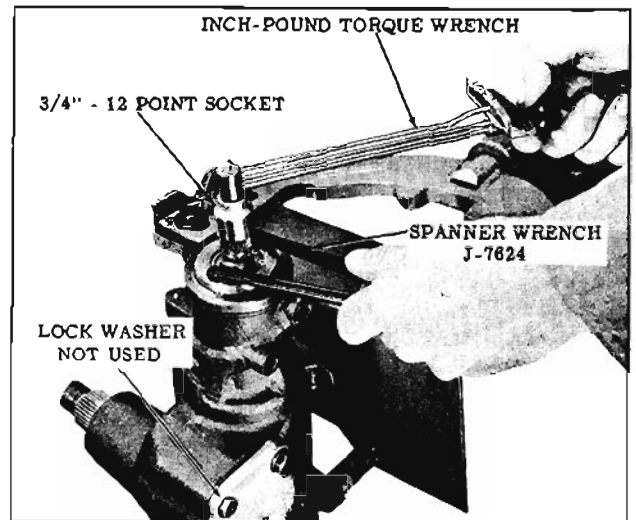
Adjusting Thrust Bearing Pre-Load
